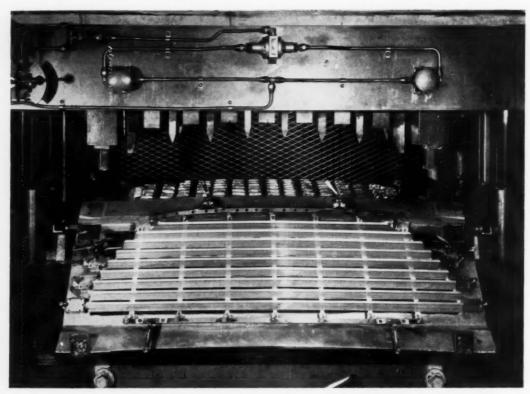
Special Crimping Machine Used in Assembling Extruded Parts Into 1961 Chrysler Grill
